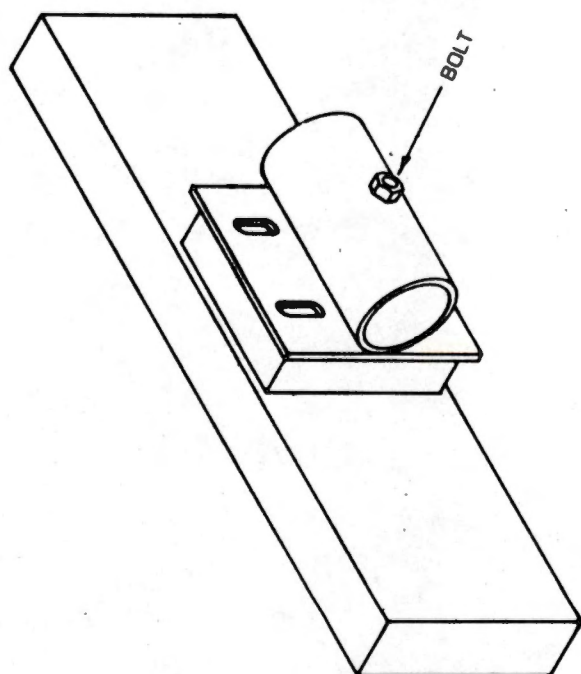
Dimensional drawing of the support pipe mounting brackets.
